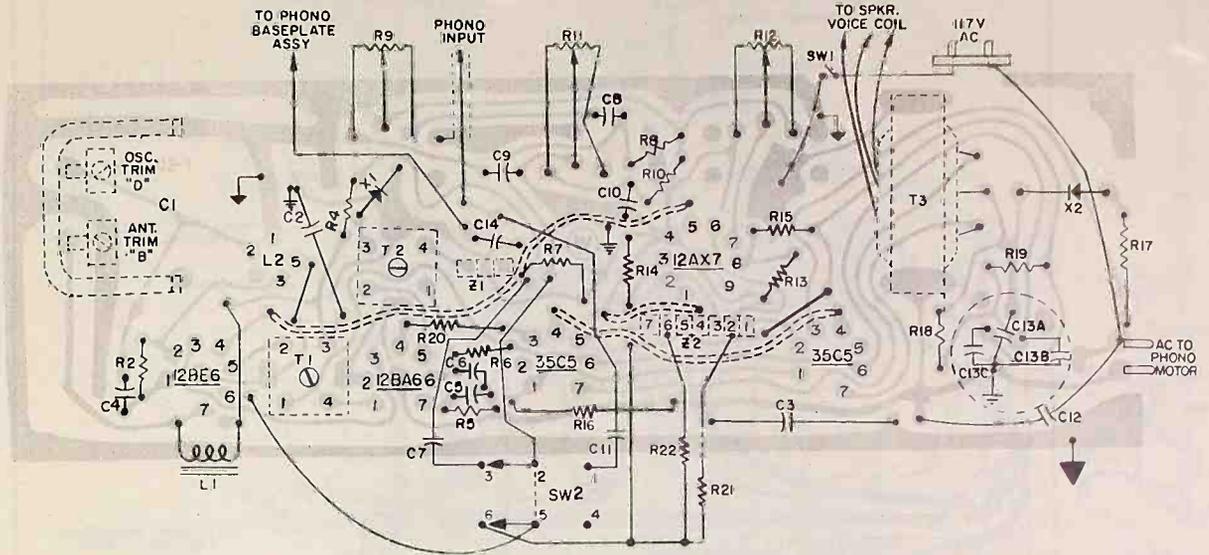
BOTTOM VIEW OF V-2503-1 PRINTED CIRCUIT BOARD SHOWING TOP PARTS AS SCHEMATIC SYMBOLS
